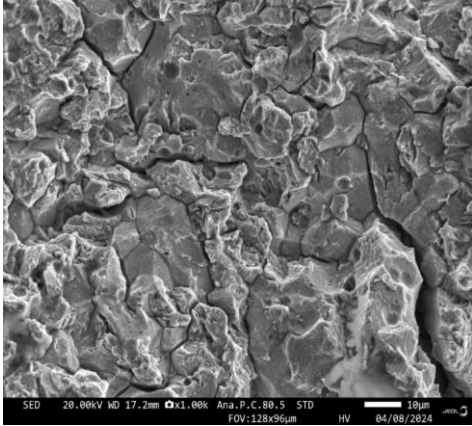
Fracture Surface bolt A near edge, Intergranular cracking.
